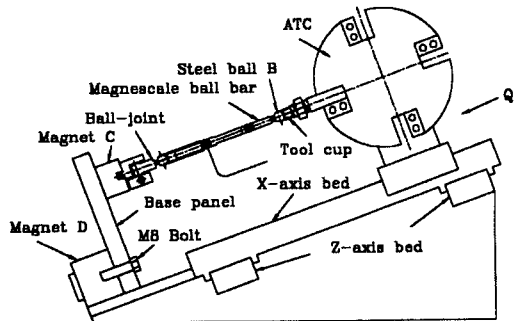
Setting of magnescale ball-bar and ATC tool cup
